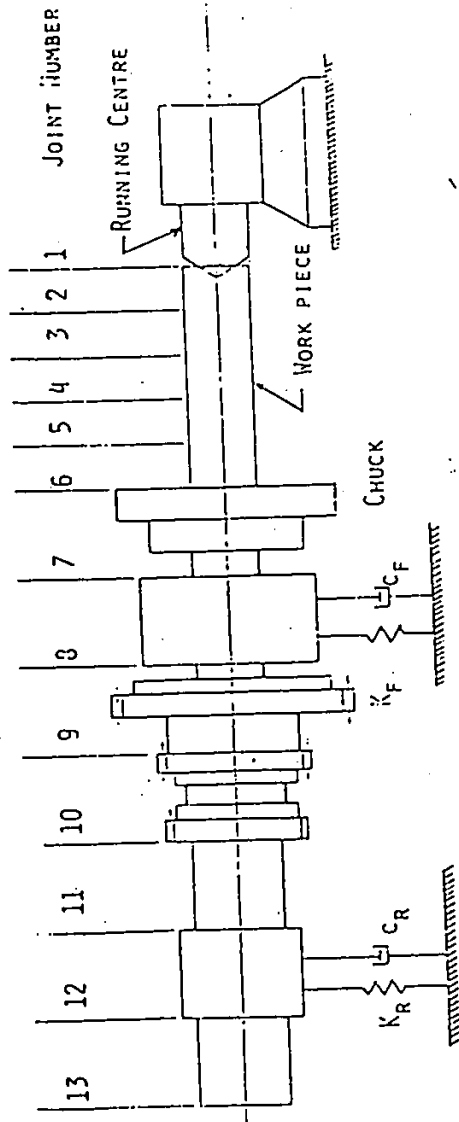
Schematic Model of a Spindle-Workpiece System.
